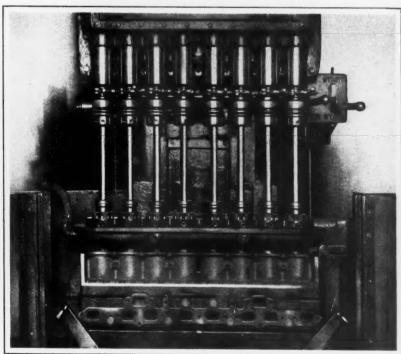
Multiple-spindle Machine Employed for the Finish-honing Operation on the Cylinder Bores
